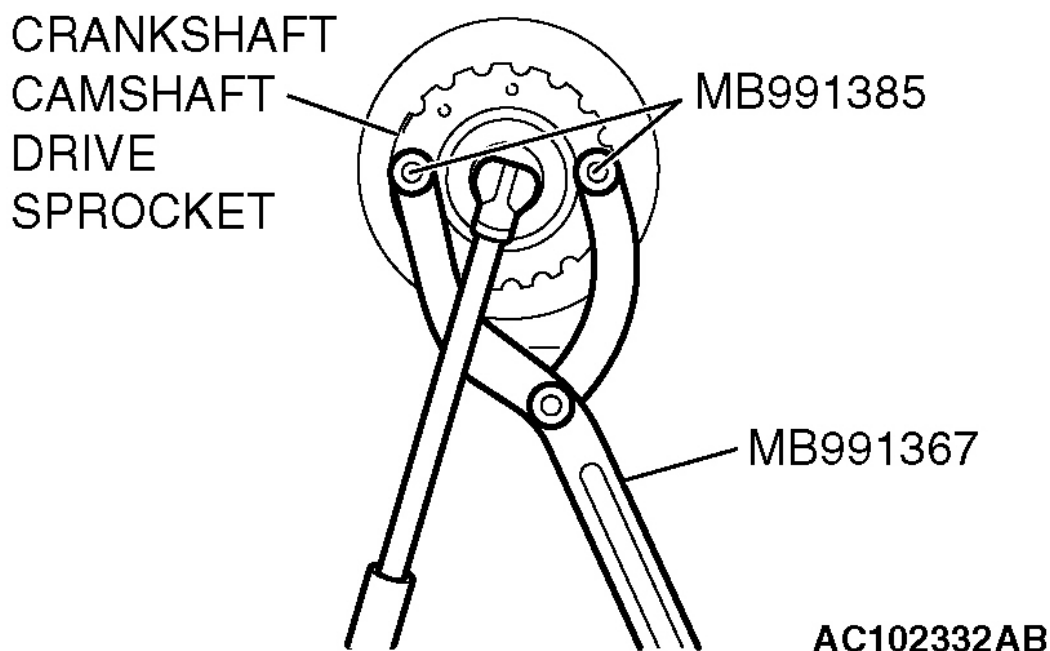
Holding Crankshaft Camshaft Drive Sprocket With Special Tools
